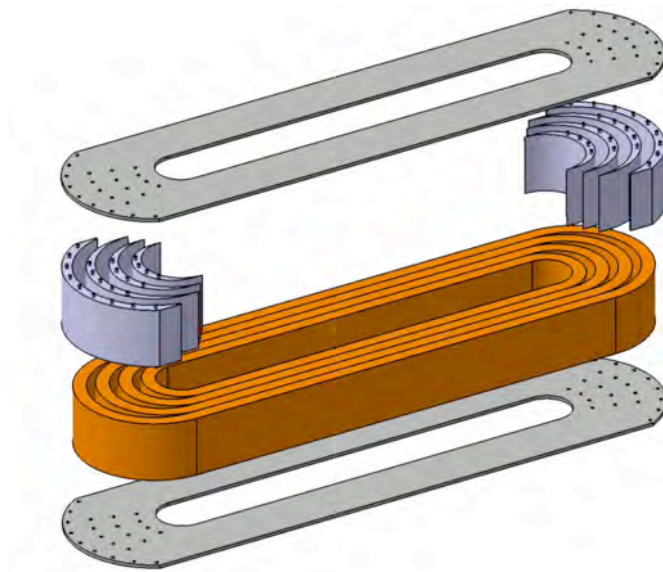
3D view of the assembled winding pack, with the spacers used to smooth the peak field at the bends
